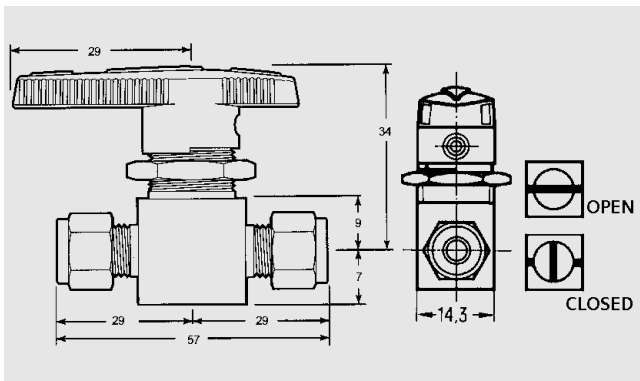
/15 Shut-off ball valve, dimensions and valve positions
